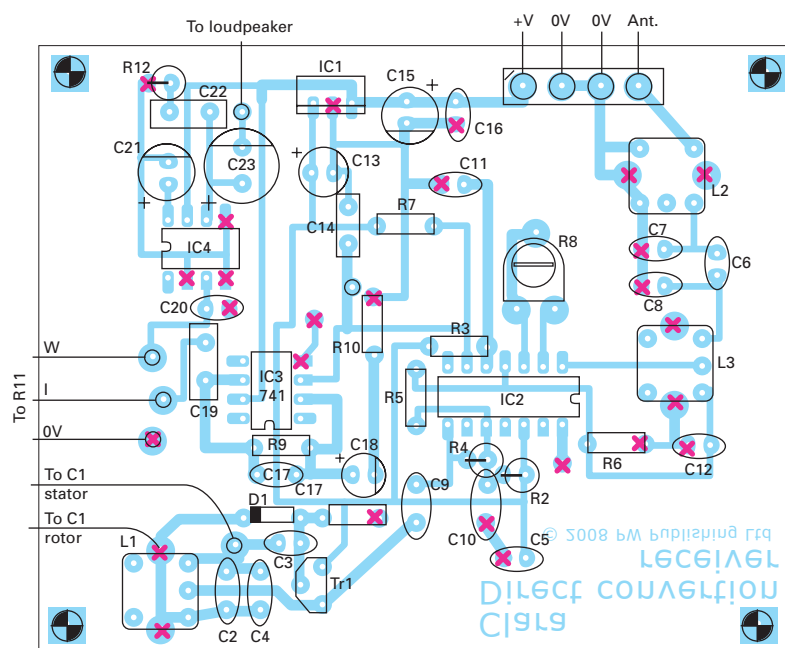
The overlay of the p.c.b. of Fig. 3. The ground-plane isn't shown, but all components have clearance holes except where shown marked with a cross.
